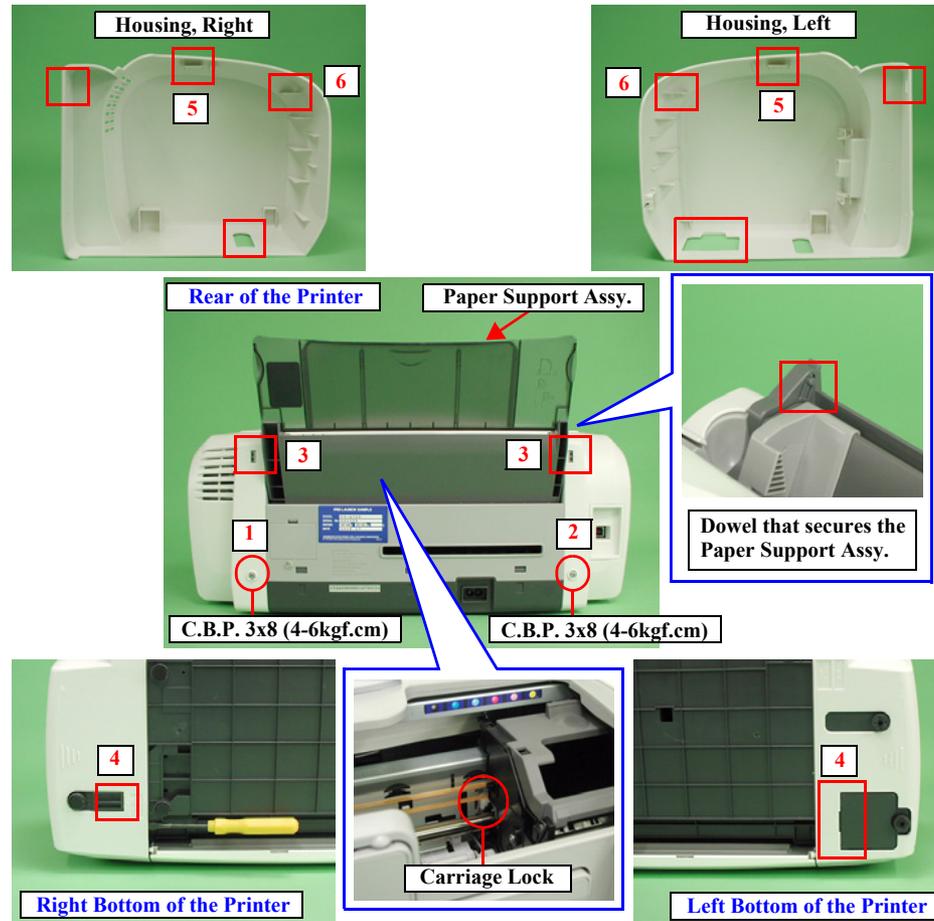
Paper Support Assy./Housing (left/right) removal
